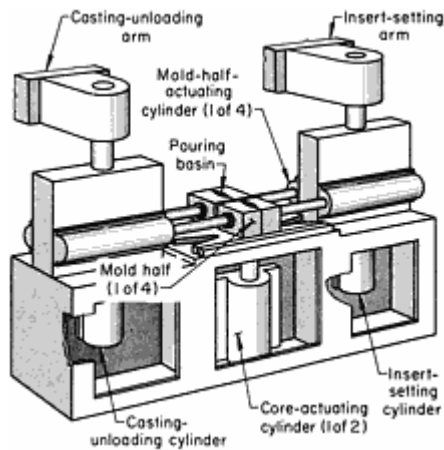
Automatic permanent mold casting machine with a setter for cast-in inserts
